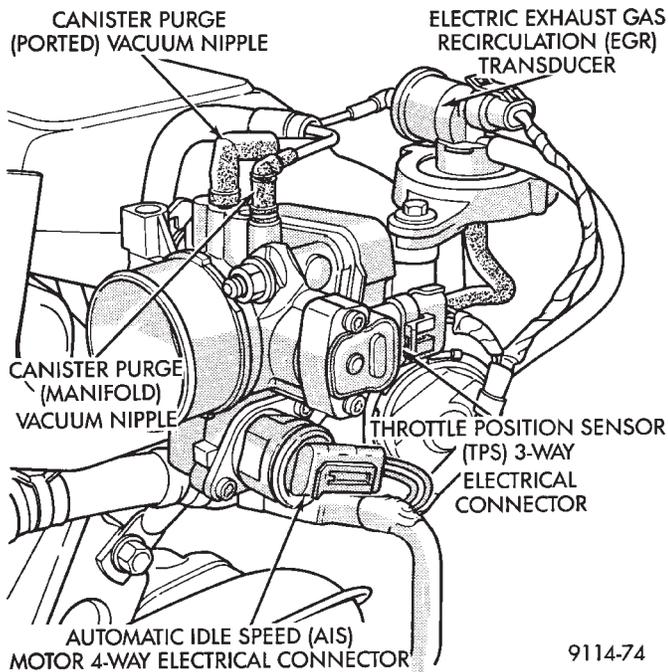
EGR Mounting—3.3L and 3.8L Engines
